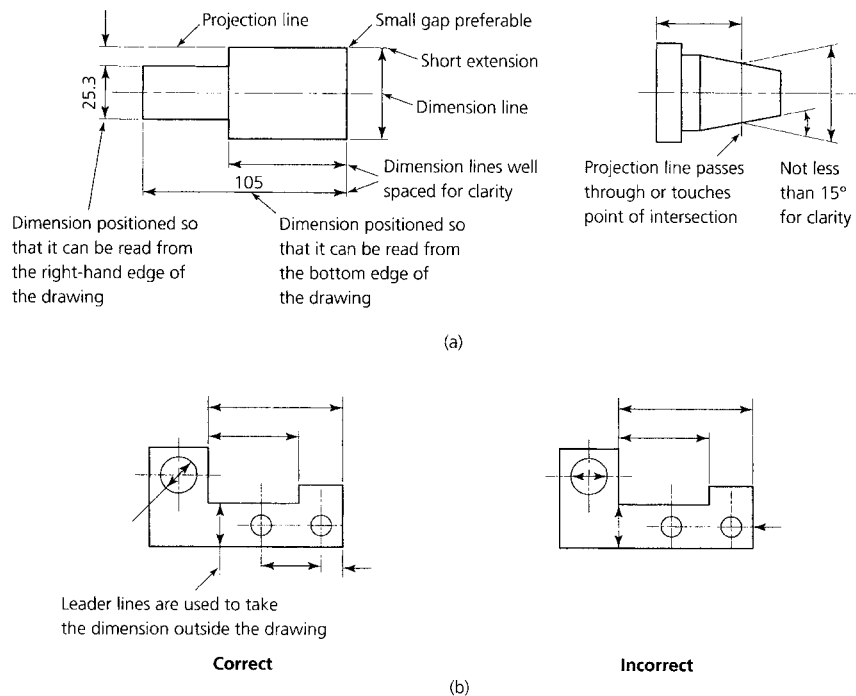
Dimensioning: (a) projection and dimension lines; (b) correct and incorrect dimensioning
